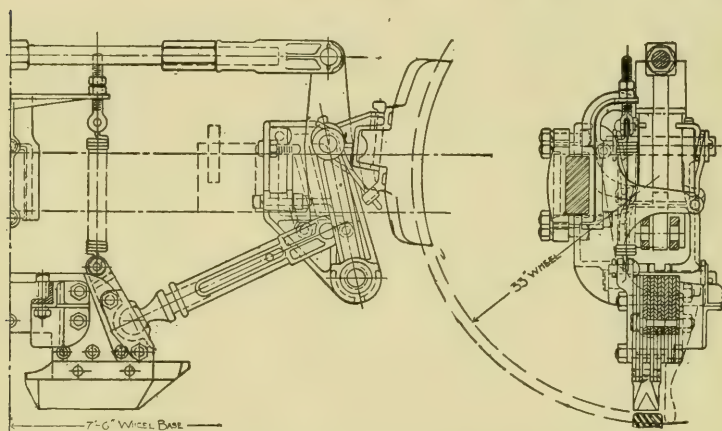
Sketch Showing General Construction of Magnetic Brake.
